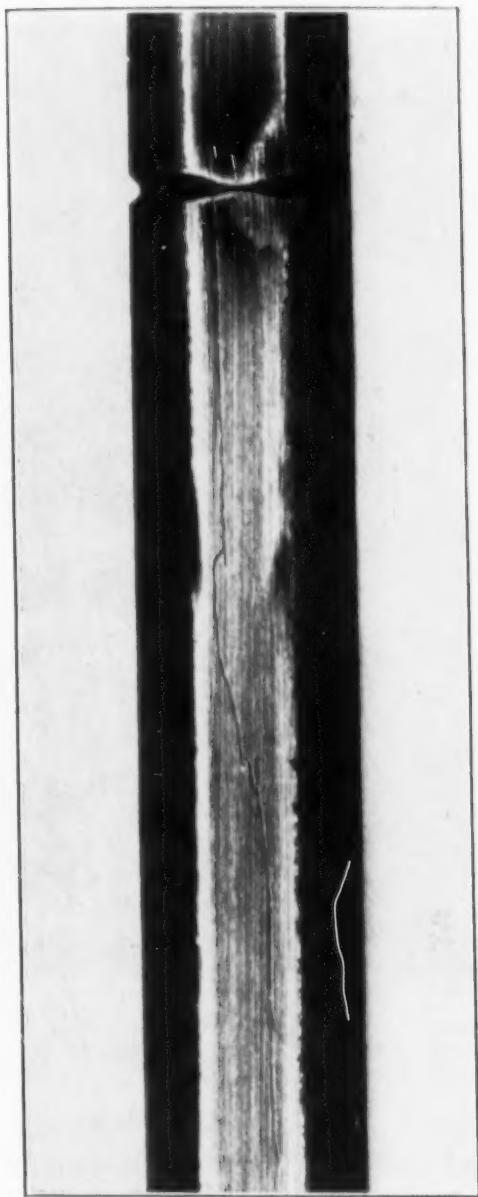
Photograph of Bar Stock for Valves—Coarse Etched, Showing Crack. (About Actual Size.)
